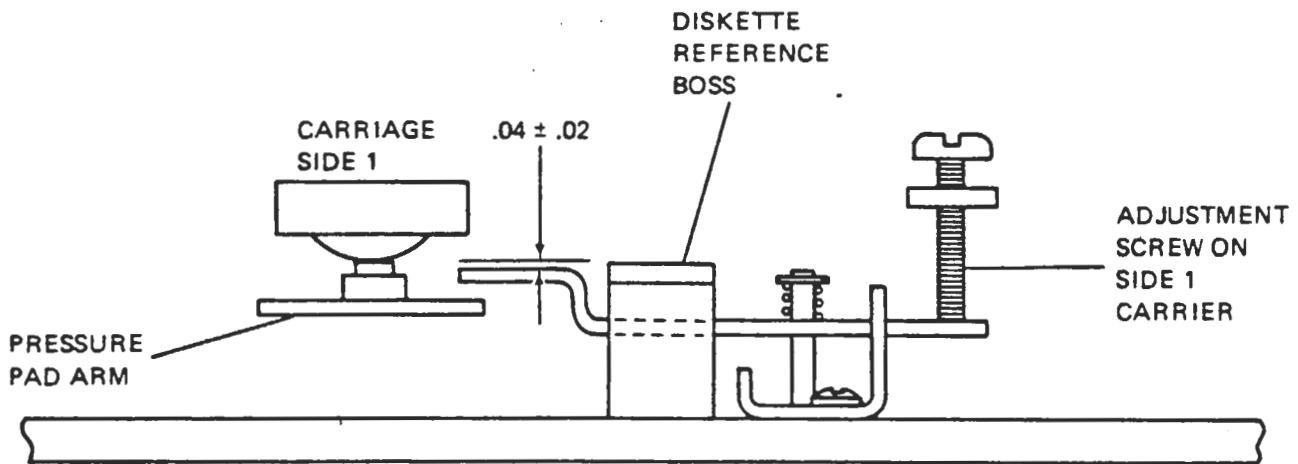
Head Pressure Arm Retract Mechanism (Side 1)
